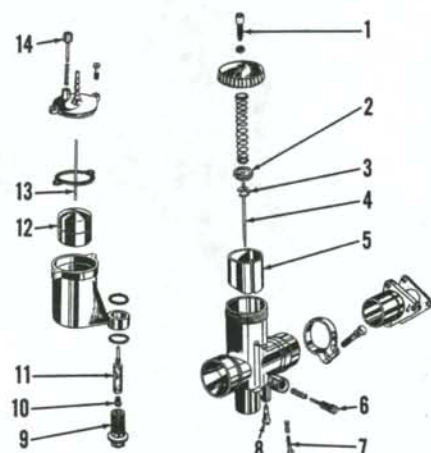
Exploded view of Puch carburetor used on 250cc models.
